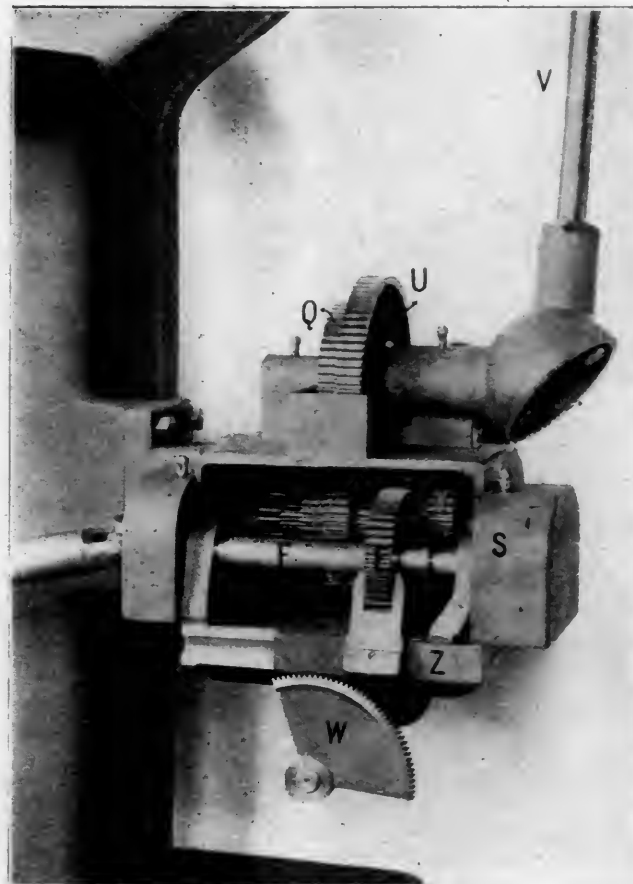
REAR VIEW OF LOWER GEAR BOX.
